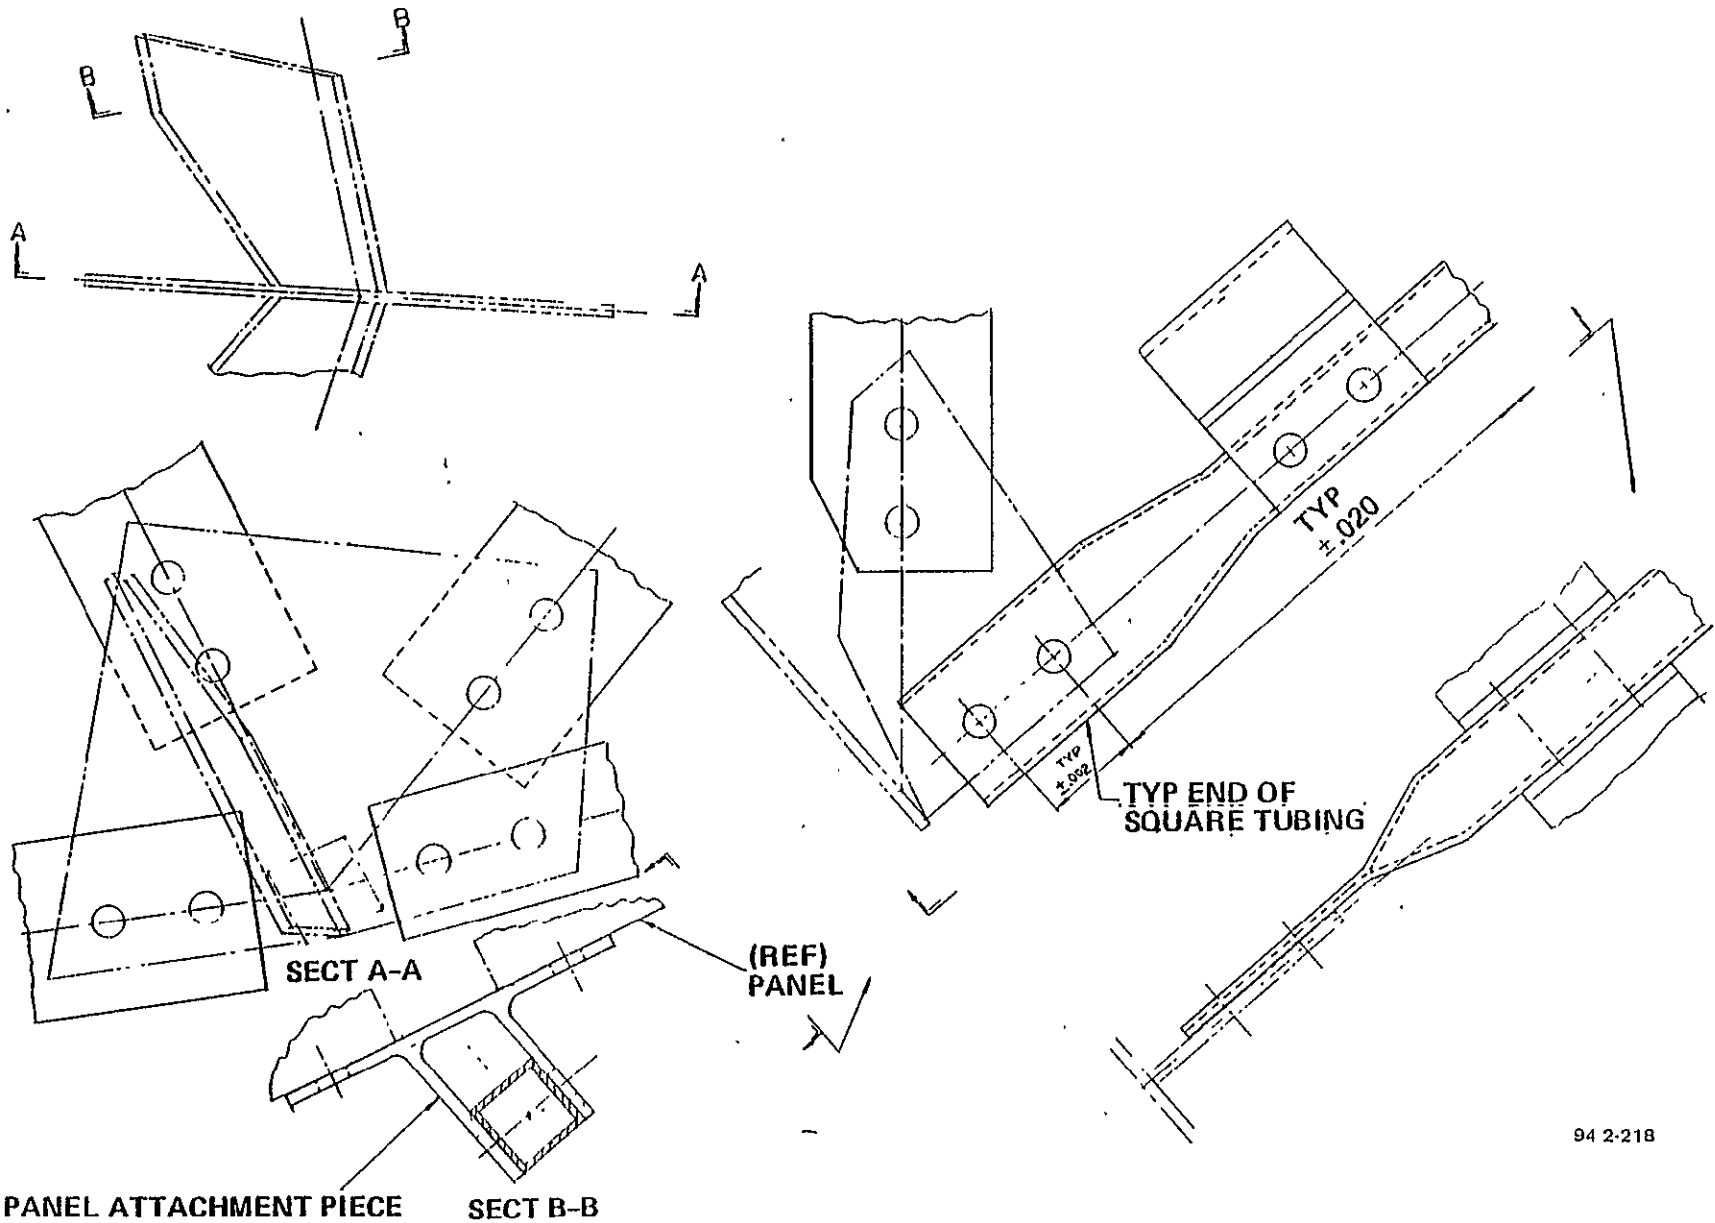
TYPICAL REFLECTOR TRUSS JOINT
